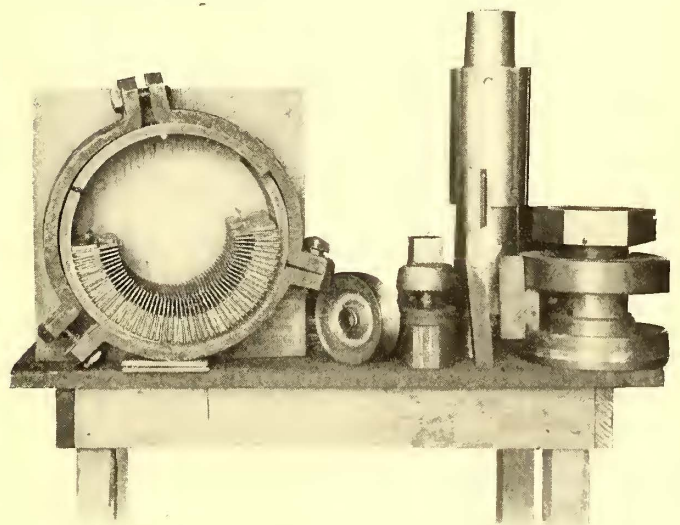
CLAMP AND COMMUTATOR SEGMENTS, ARBOR FOR TROLLEY WHEEL, TOOL FOR TURNING TROLLEY WHEEL, EXPANDING MANDREL AND COMMUTATOR CORE
